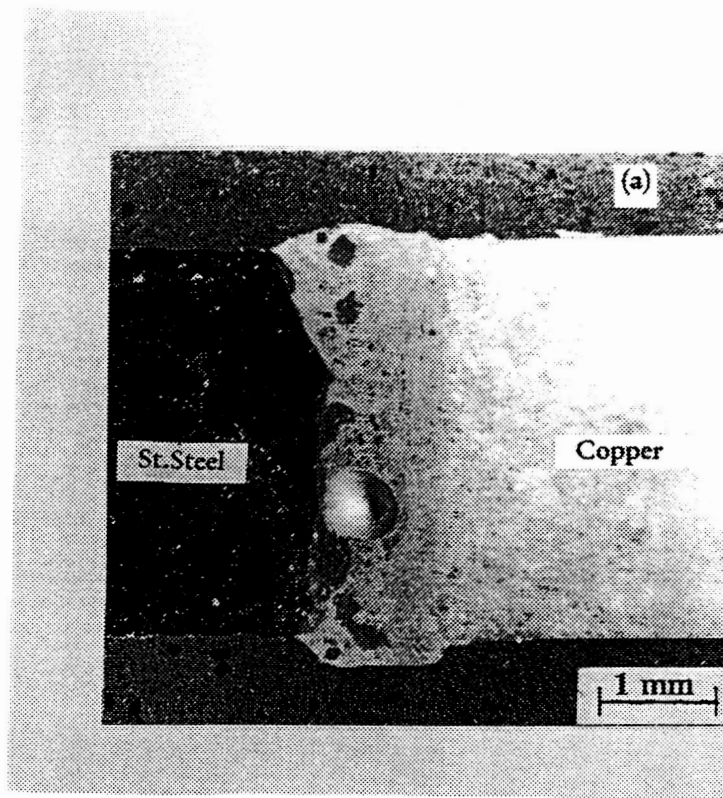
Cross-section of copper/stainless steel weld. Compressed air cover gas.
